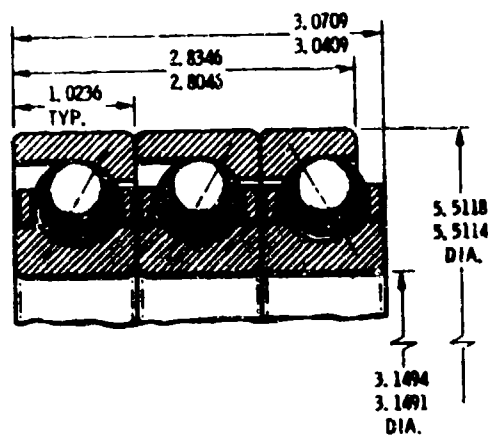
7216-size angular-contact ball bearing triplex set.
